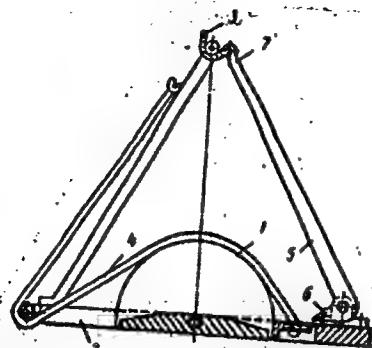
1- soil-collecting container; 2- frame; 3- carrying cable; 4- elastic pull; 5- lever; 6 and 7- lever arms
